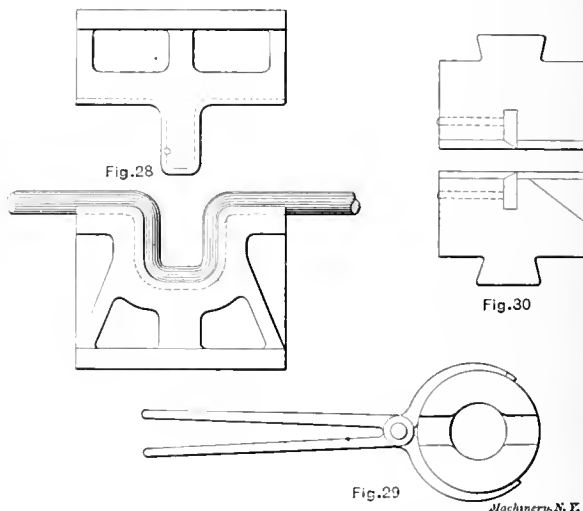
Die for forging Crank. Fig. 29. Tong for Holding Dies. Fig. 30. Cutters for Nicking the Stock, fitted at the End of the Dies.
